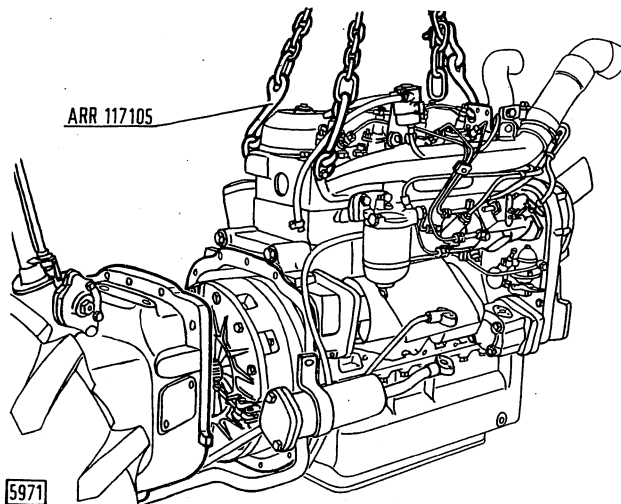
/10 - Removing engine from tractor with lifting hook ARR 117105.
